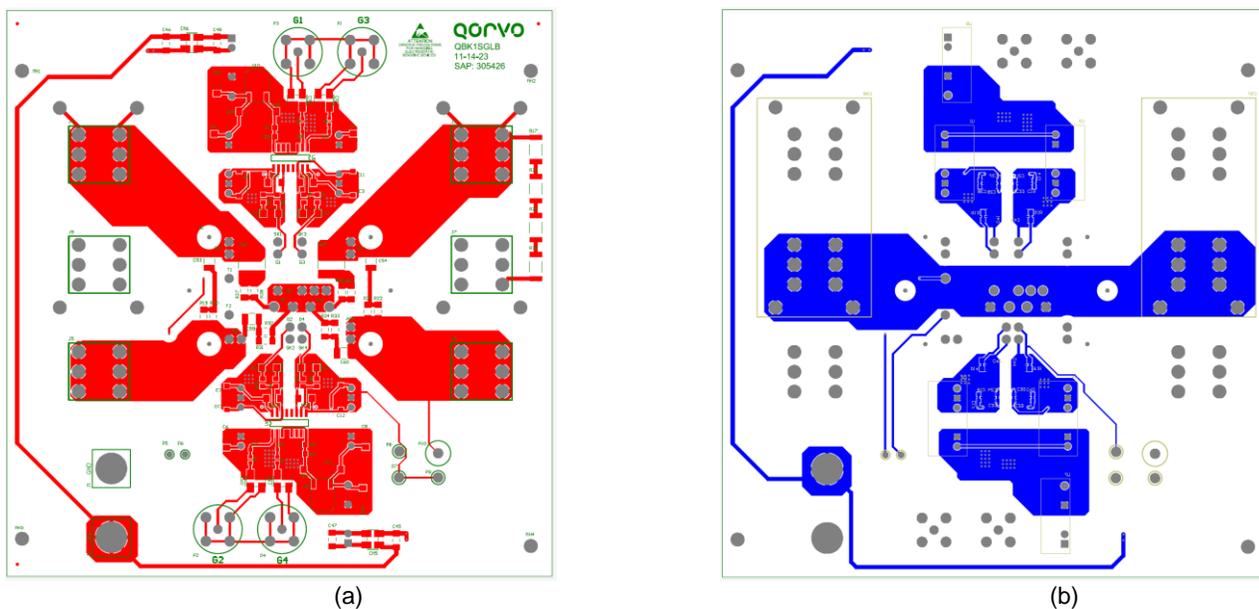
Full-bridge E1B module DPT EVB PCB print. (a) top layer and (b) bottom layer.
